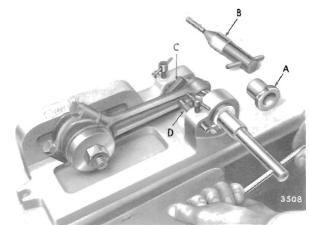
Reaming the gudgeon pin bush - using tool No. 6200B
